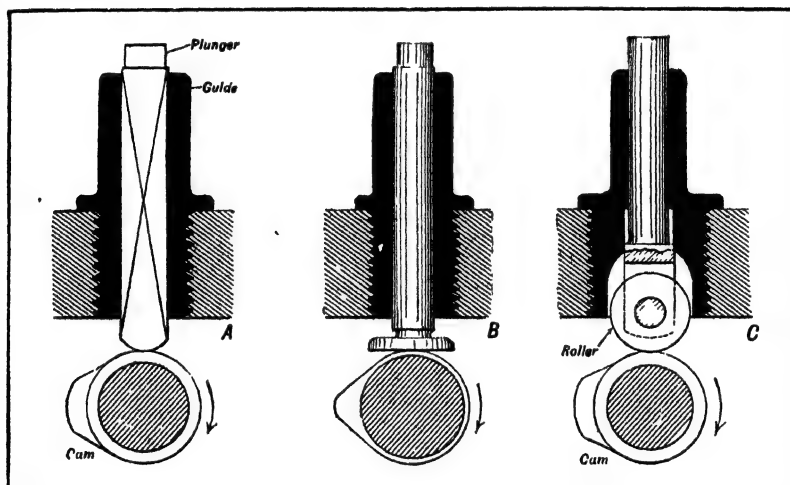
Diagram Showing Principal Types of Cam Followers that Have Received General Application in Automotive Engines.
